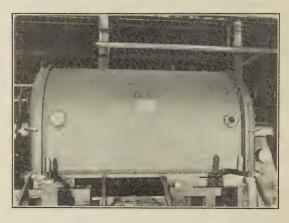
Kv-a. Turbo Generator Assemblor for Test
